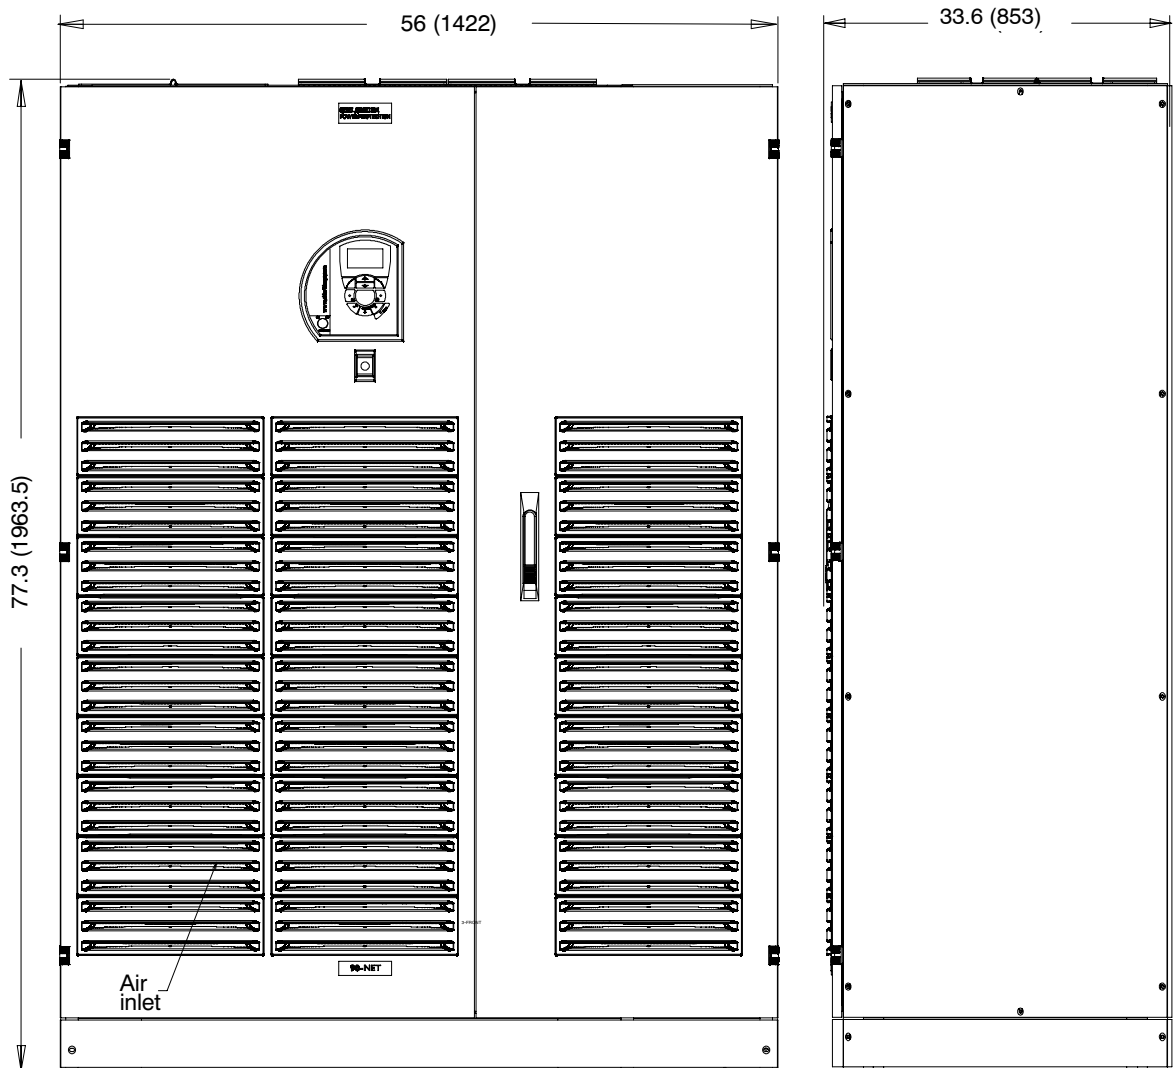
UPS External Dimensions - Front and side views 300-500kVA
